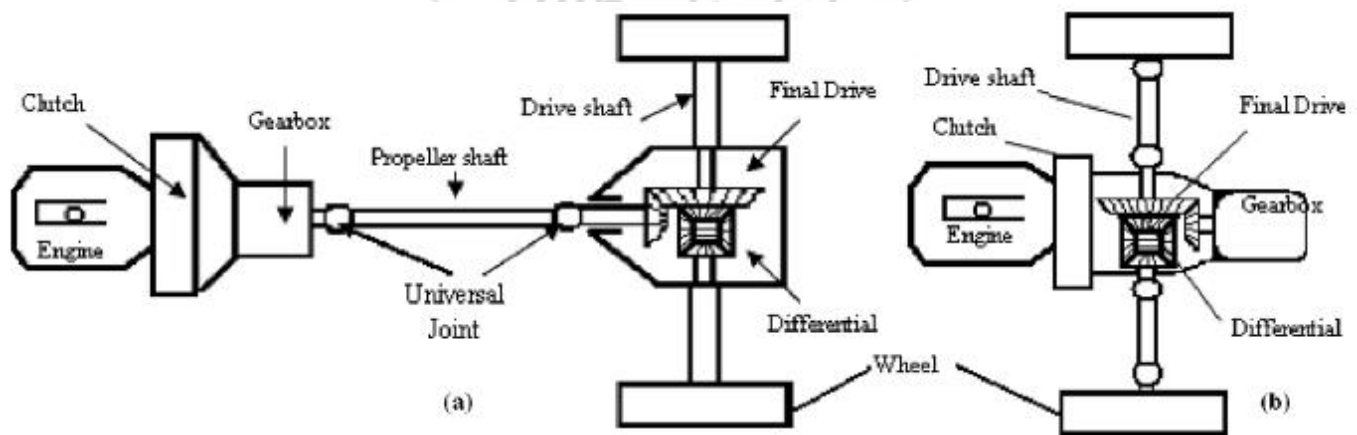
Elements of Power Transmission System (a) Rear Wheel Drive (b) Front Wheel Drive.
